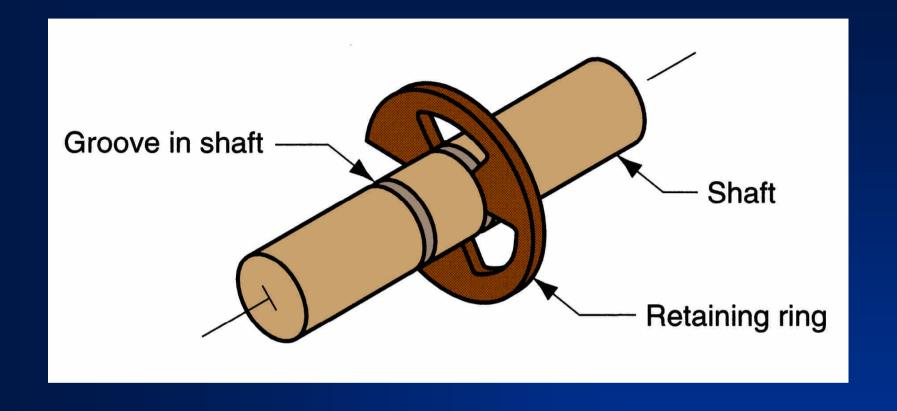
Retaining ring assembled into a groove on a shaft
